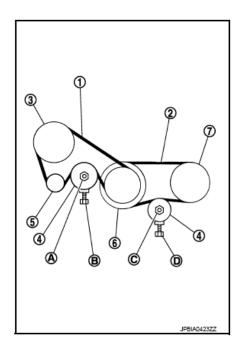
Power Steering Oil Pump Belt Layout Courtesy of NISSAN NORTH AMERICA, INC.
